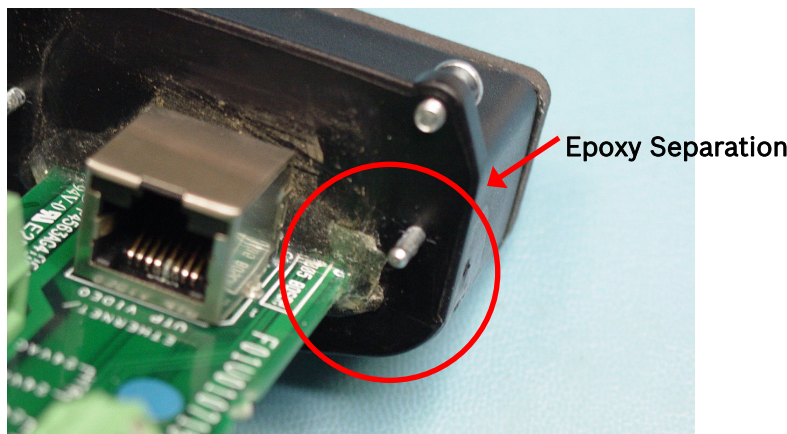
VG4 Pipe Mount Interface Board showing Epoxy Separation
